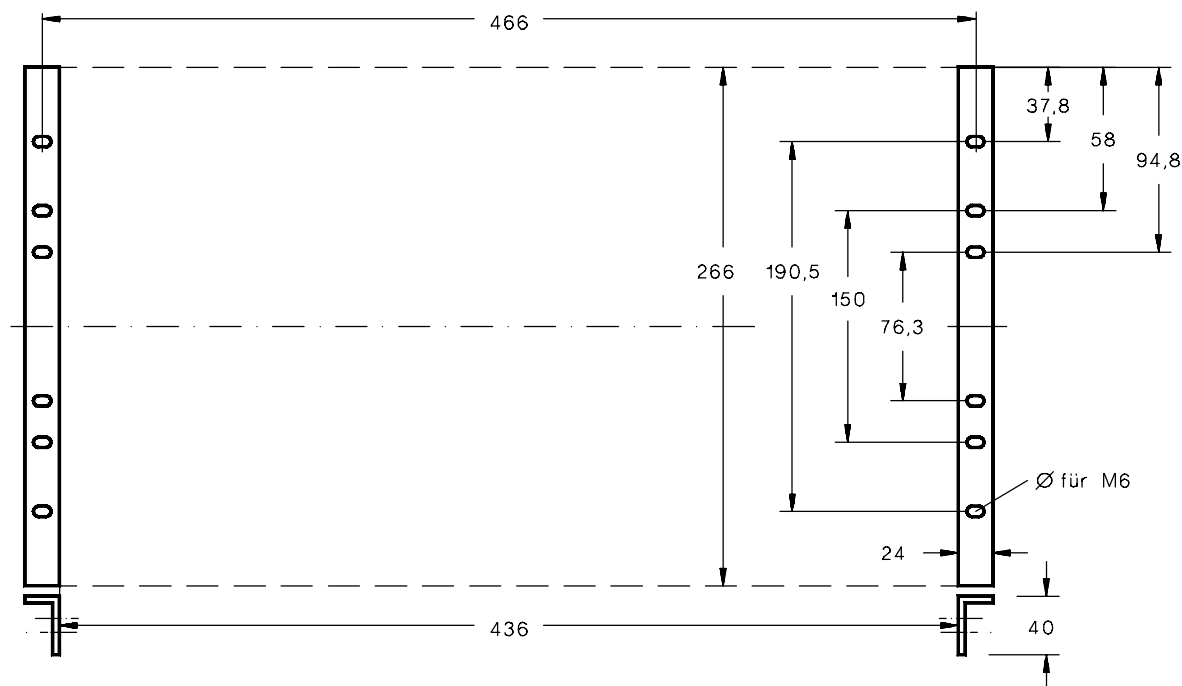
Dimension Drawing of the Mounting Flange for DTA 107
